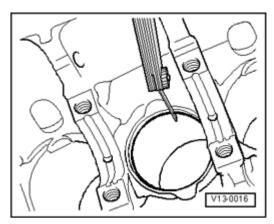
Checking Piston Ring Gap Courtesy of VOLKSWAGEN UNITED STATES, INC.
